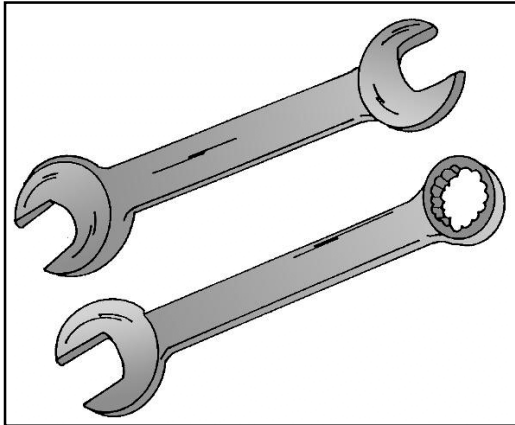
A double open-ended spanner in the upper view and an open-ended/ring spanner in the lower view. Always make sure that the spanner size is suitable for the nut or bolt to be removed and tightened.
